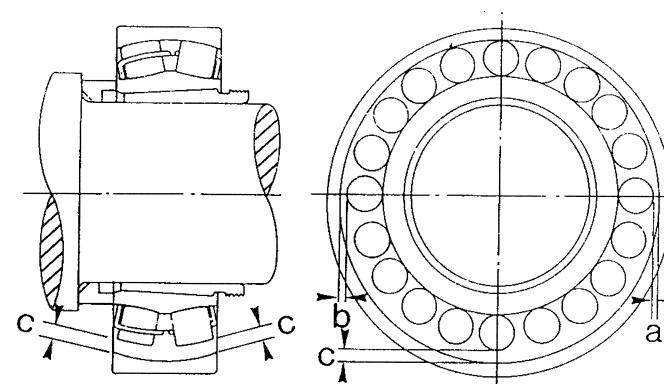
C Measuring Clearance of Large Size Spherical Roller Bearings
